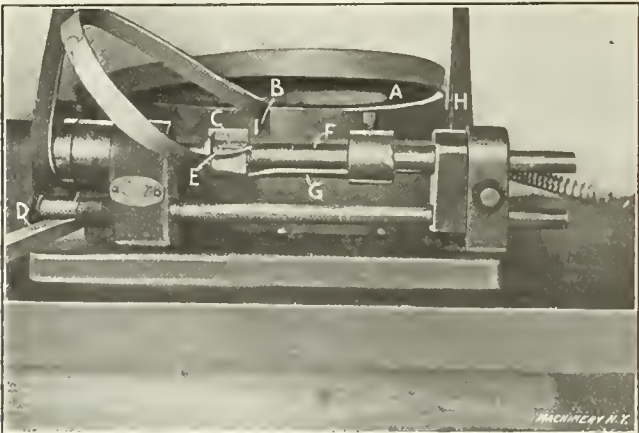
Machine for Winding and Inserting the Base Wad in the Shell
